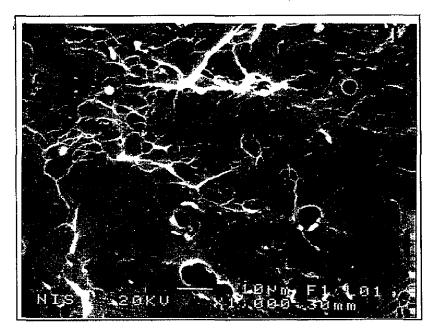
FRACTURE SURFACE OF THE SHOULDER OF THE RUPTURED CYLINDER THAT SHOWS SUSTAINED-LOAD-CRACKING (MAG. 1000X) -- ITEM 3A
